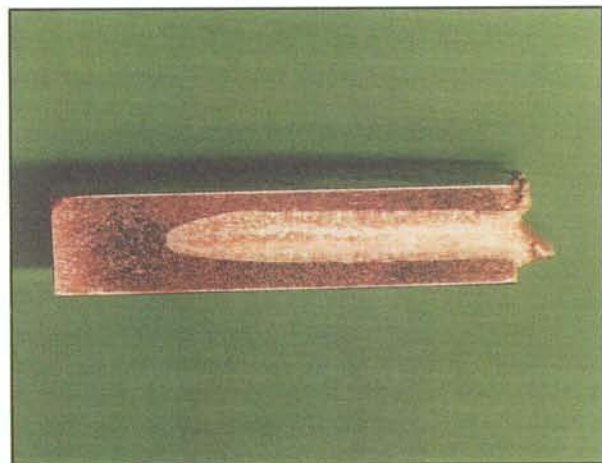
A metallographic section of an approximately 55 mm deep weld in copper.
